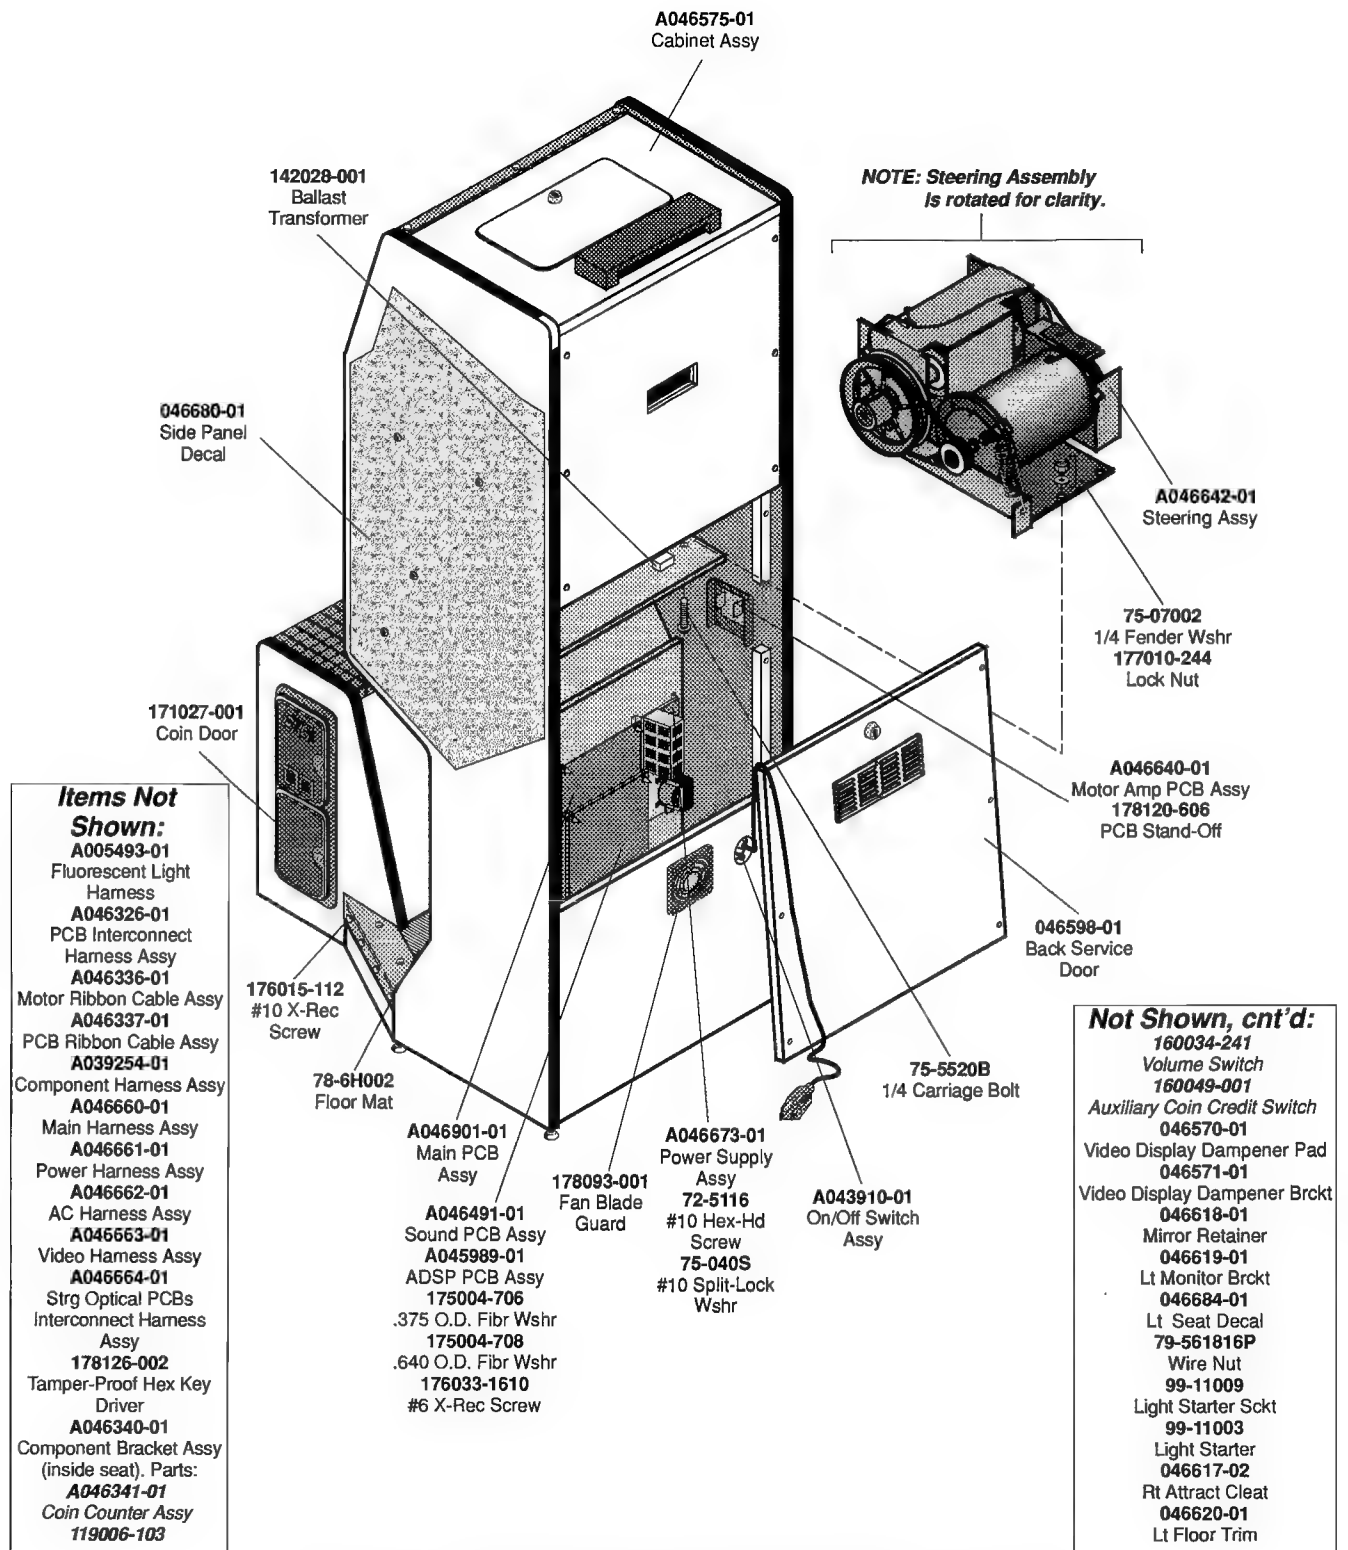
Cabinet-Mounted Assemblies, Rear View
